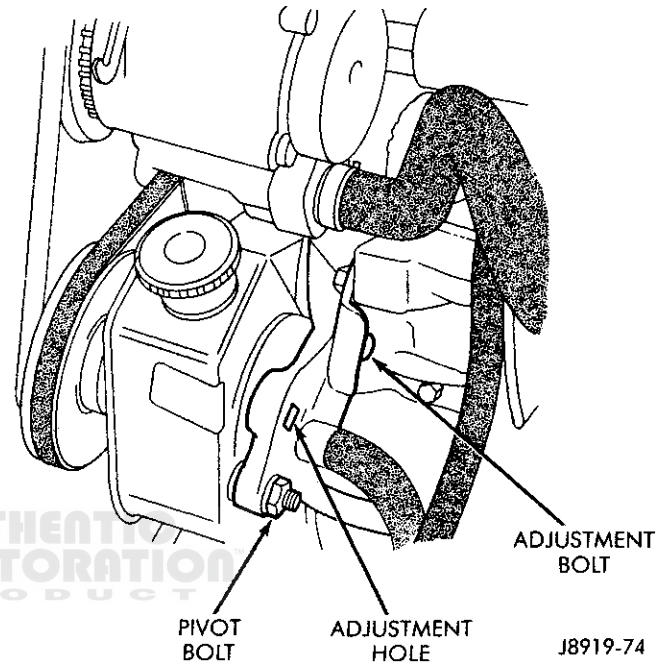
V-Belt Adjustment — 2.5L/4.2L
